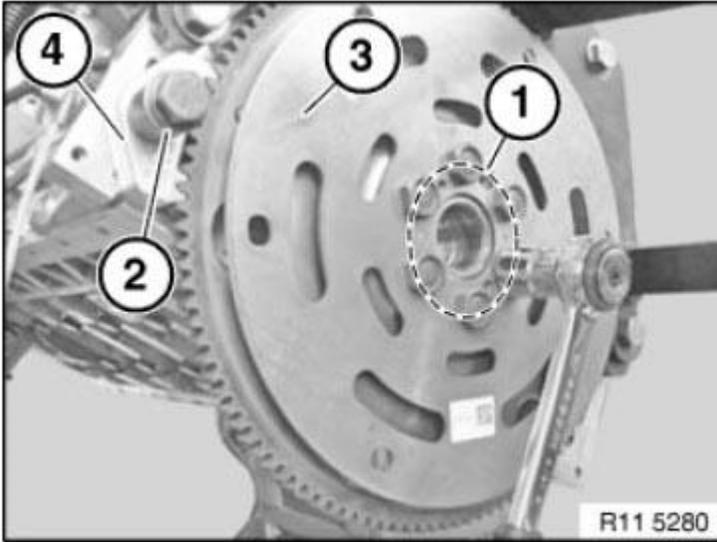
Identifying Flywheel With Bolts And Special Tool
